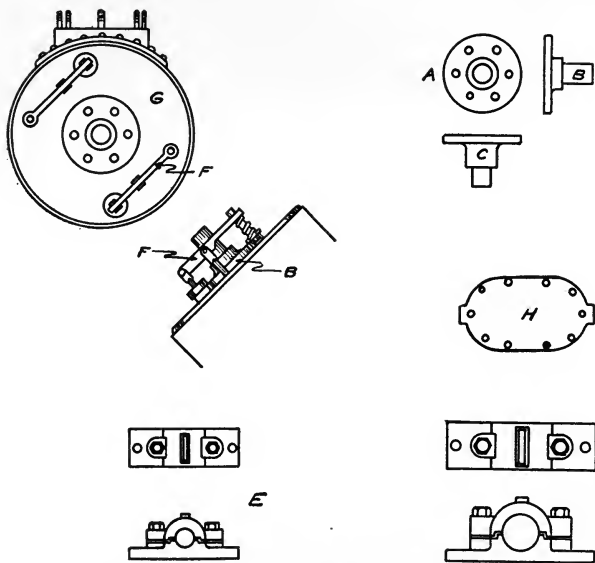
C—DETAILS OF TUMBLING BARREL EQUIPMENT
